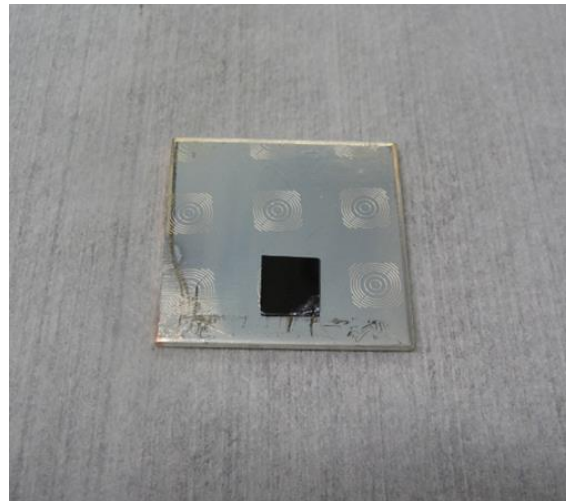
The broken Si chip still bonded to the Cu substrate after the simple shear test
